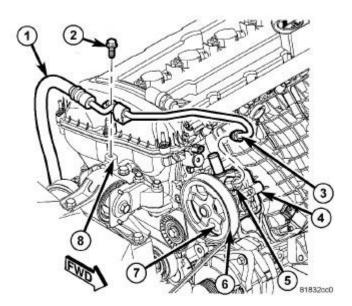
Power Steering Assembly Components Courtesy of CHRYSLER GROUP, LLC
